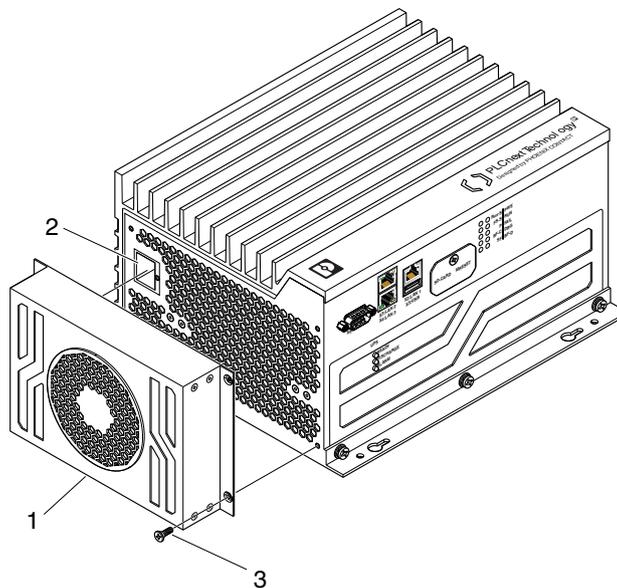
Removing the BPC 9102 FAN KIT fan kit
